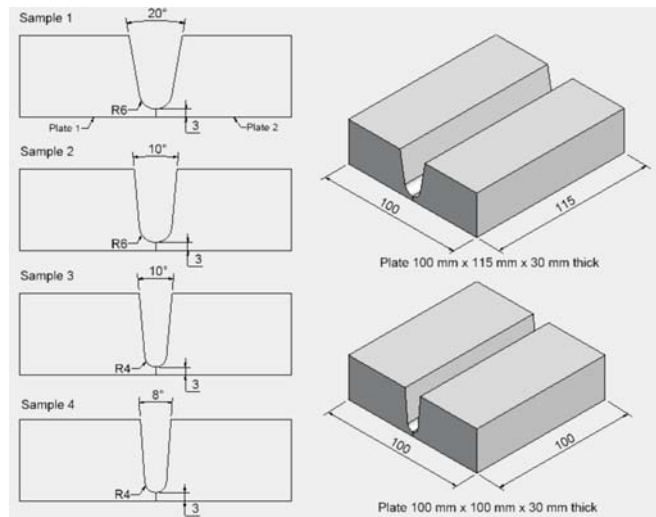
Weld joint config. for 30 mm thick plate
